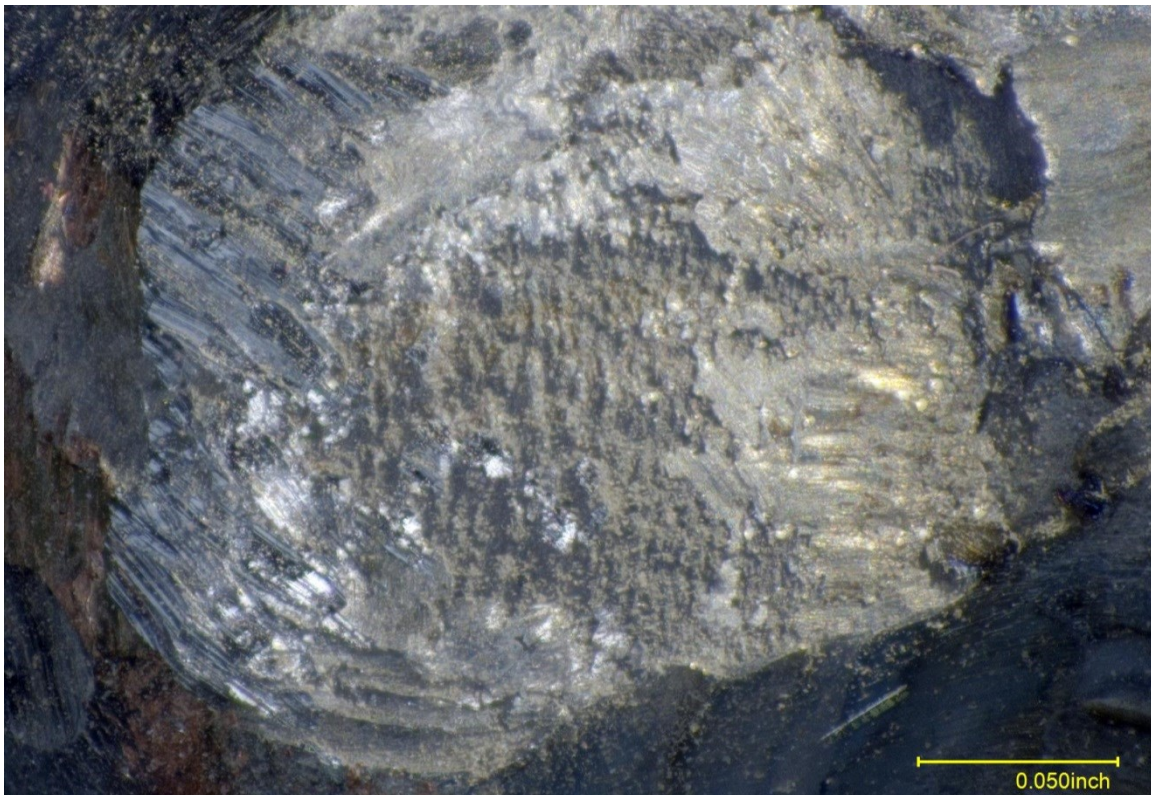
Closer view of the undamaged fracture surface on the fractured bolt.
